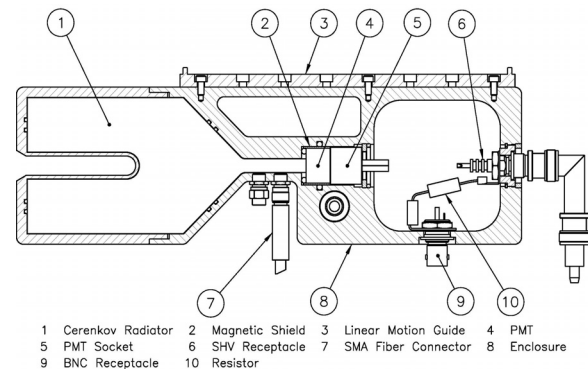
Cross section view of the BLM detector configuration with the component call outs.
